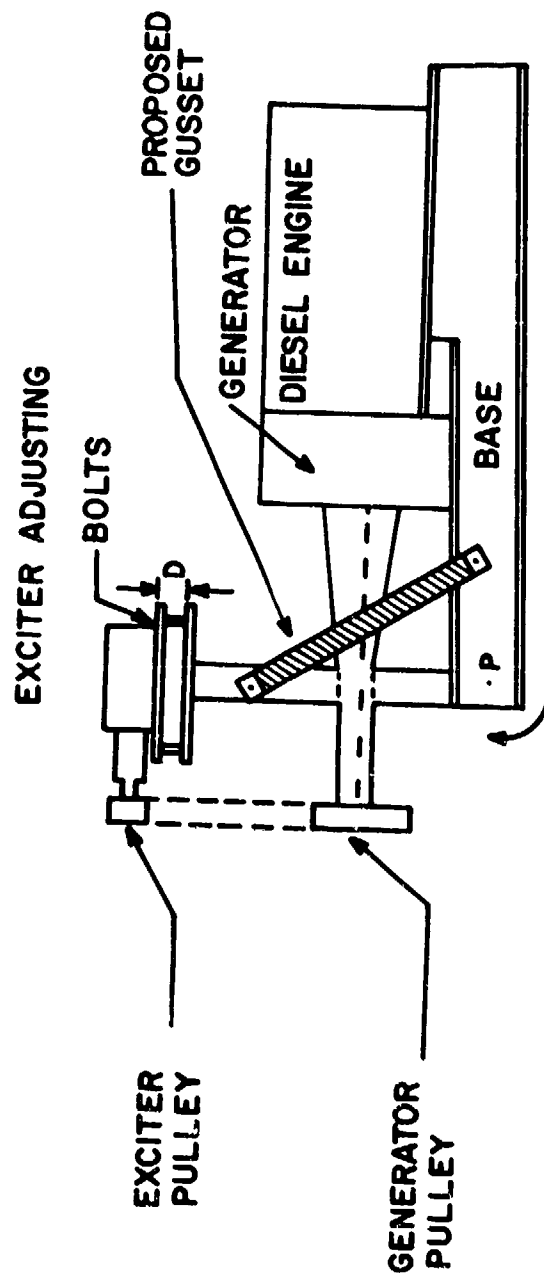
Schematic arrangement of generator and exciter base and mountings.
